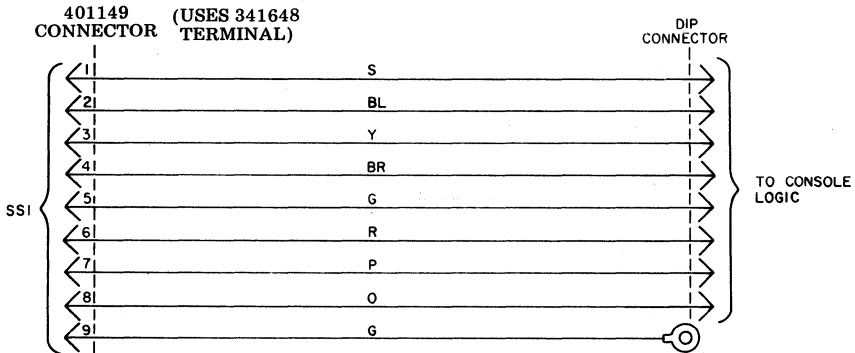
346387 Cable Assembly for Late Design 40K101, 40K104/203 and 40K105 Opcons
